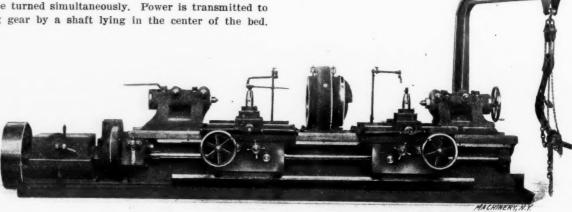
Lodge & Shipley Single Pulley Drive Axle Lathe.
